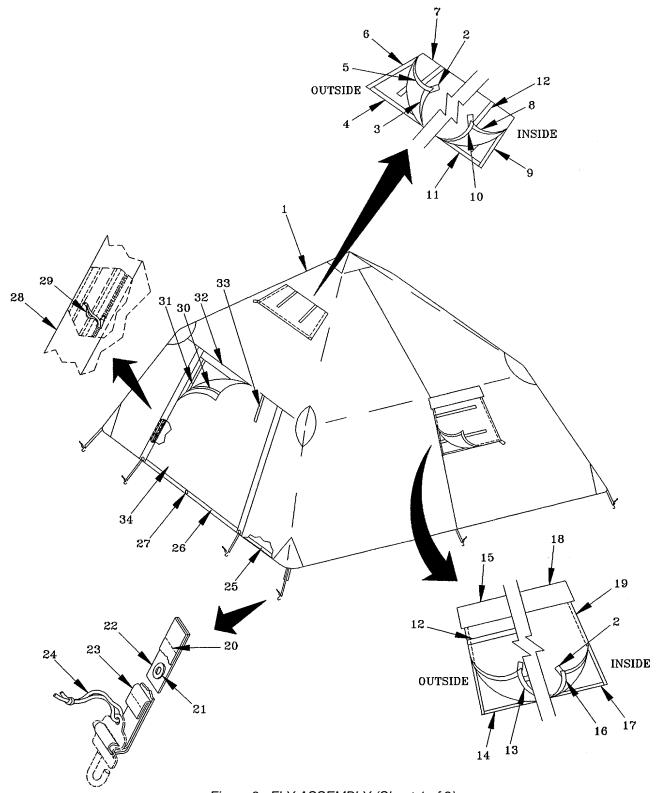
FLY ASSEMBLY (Sheet 1 of 2)
